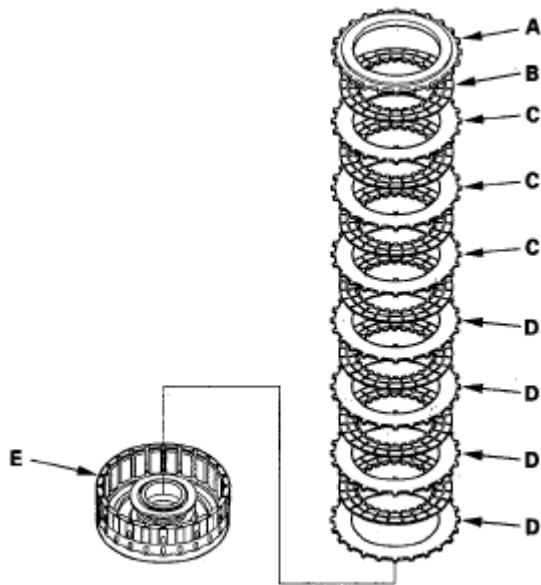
Identifying Clutch End Plate, Clutch Discs, Clutch Wave-Plates And Clutch Flat-Plates
